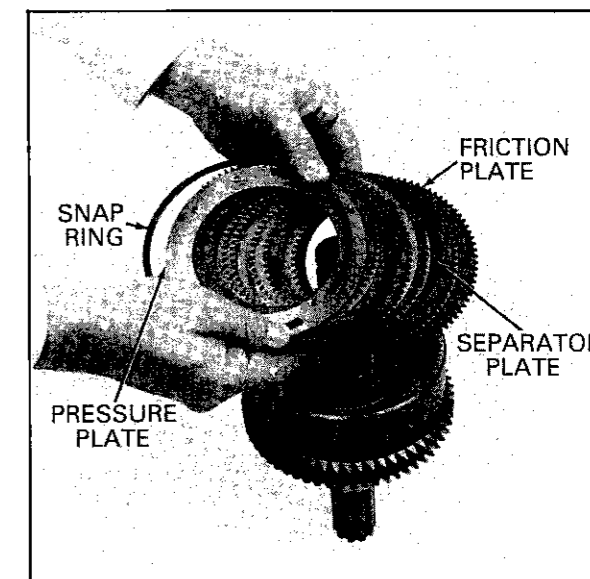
PRESSURE PLATE AND CLUTCH PACK REMOVAL
